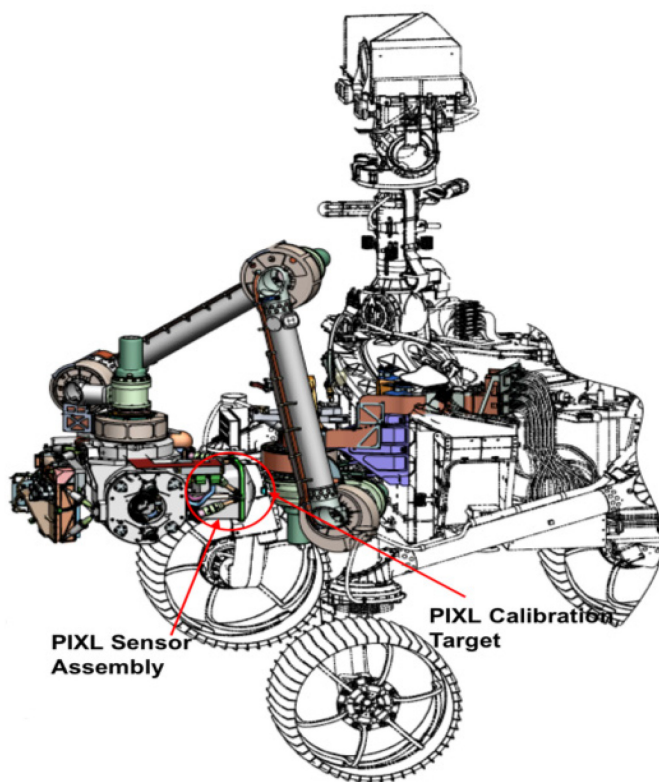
PIXL Sensor assembly and Calibration Target locations on the robotic arm.
